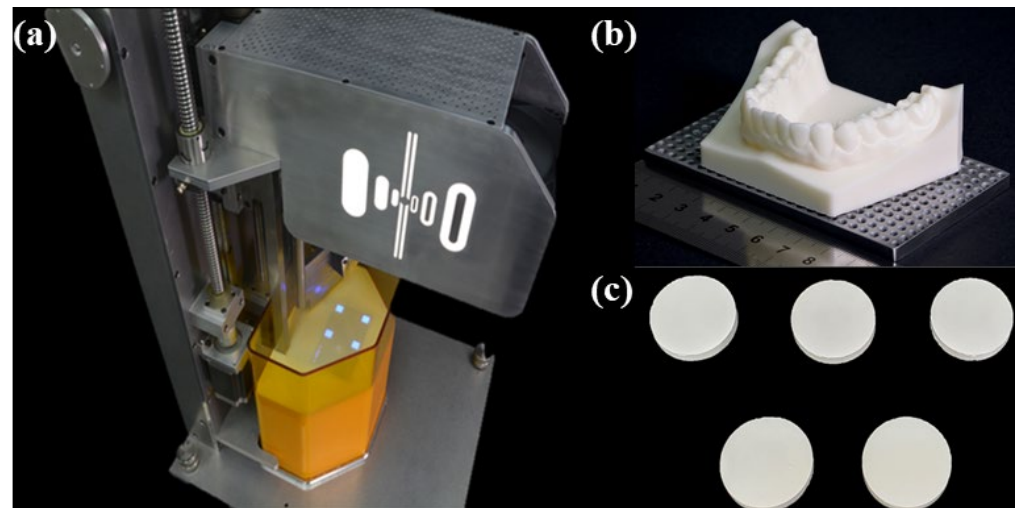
DLP machine used for preparing zirconia samples: (a) DLP machine curing formulations; (b) mandible and teeth model manufactured using DLP machine; (c) zirconia disk samples manufactured by DLP machine.
